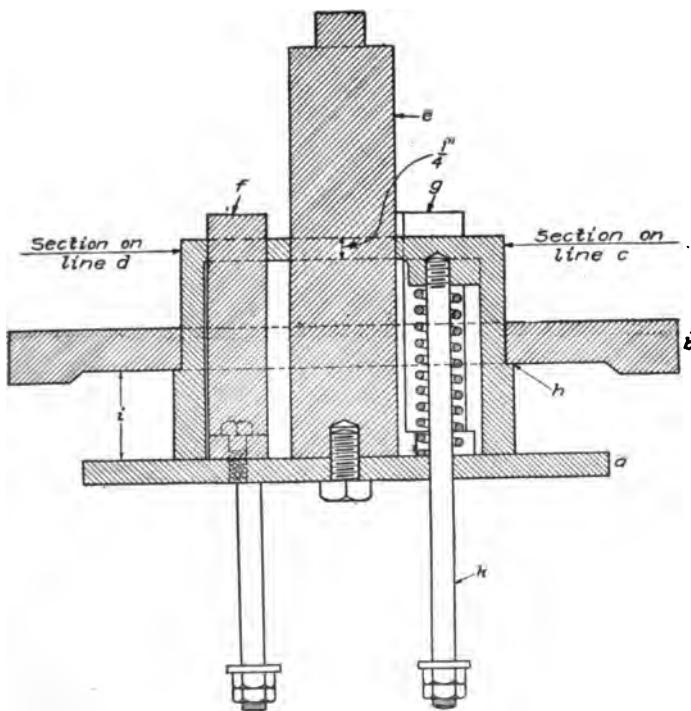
Section of Pattern, Stripping Plate, and Draw Plate for Casting, Fig. 359
